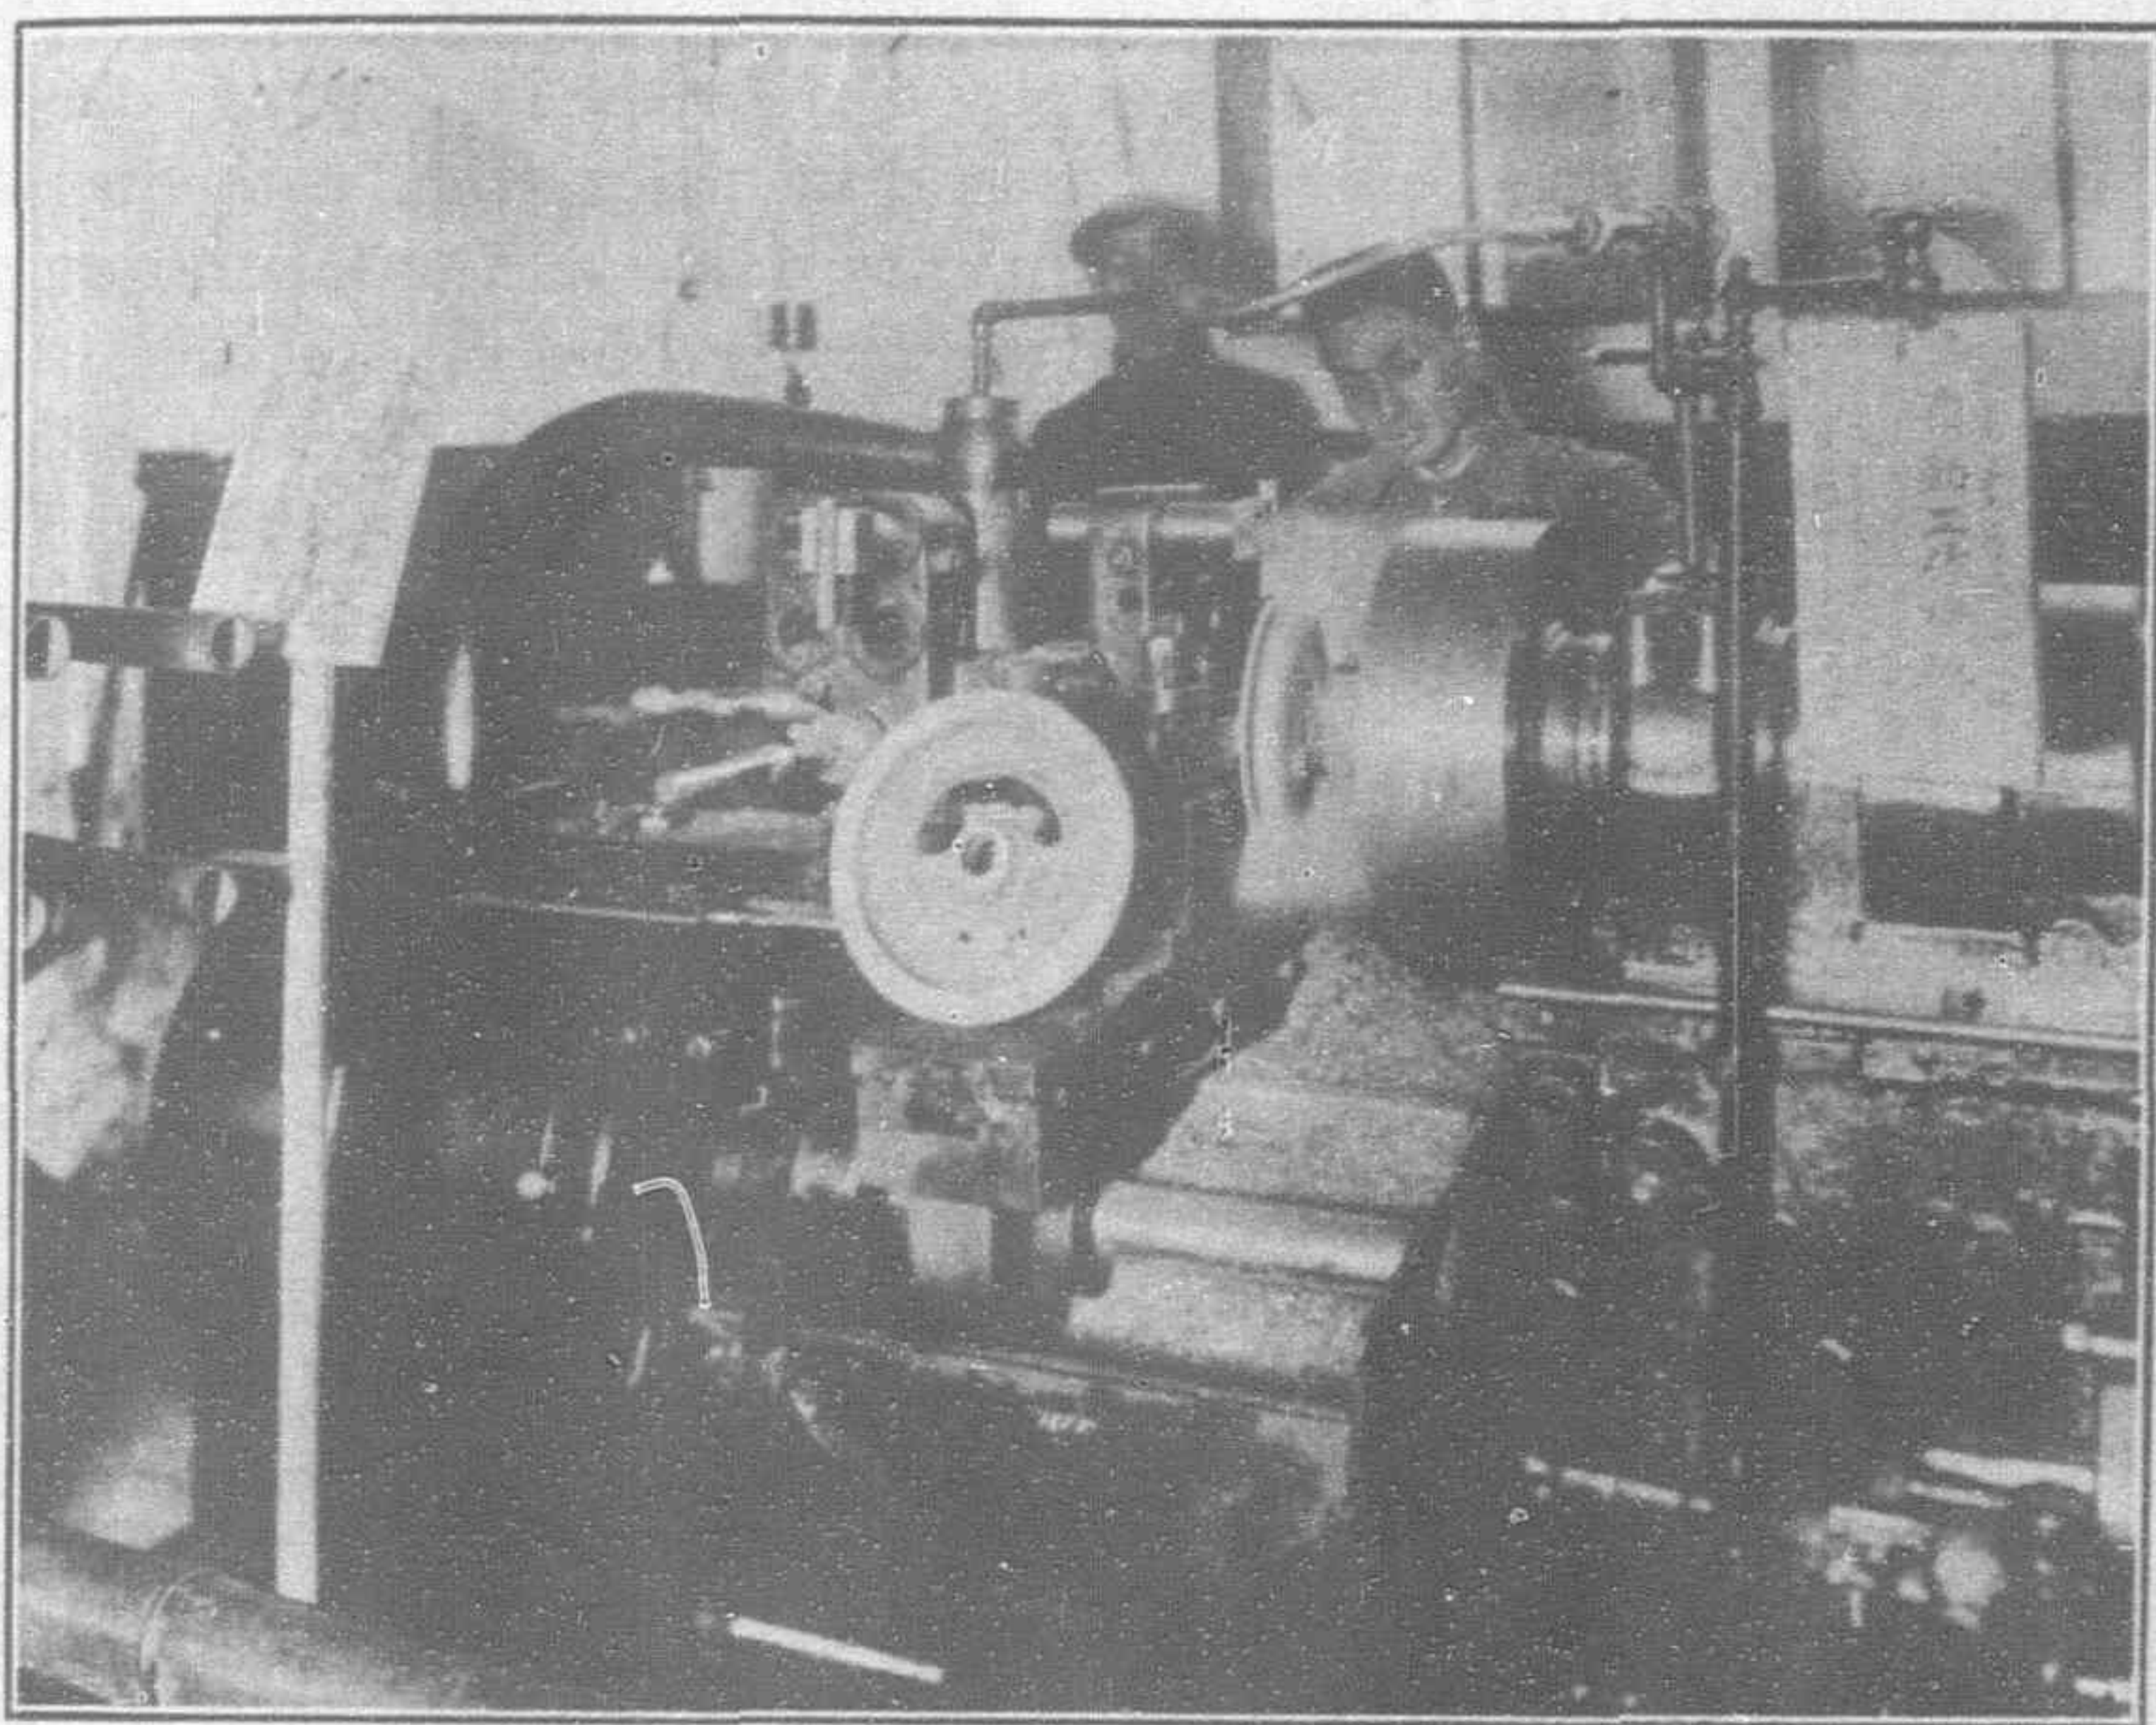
Automatic Chucking Machine, at work machining  $7\frac{1}{2}$  h.p. Motor and Shields in  $7\frac{1}{2}$  minutes each
